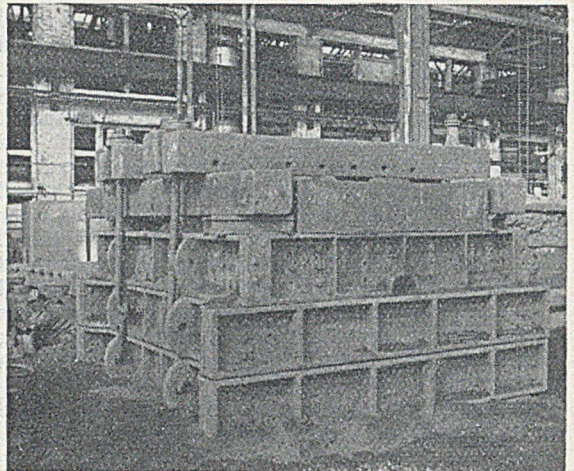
Assembled Condenser-shell Mould ready for pouring.
